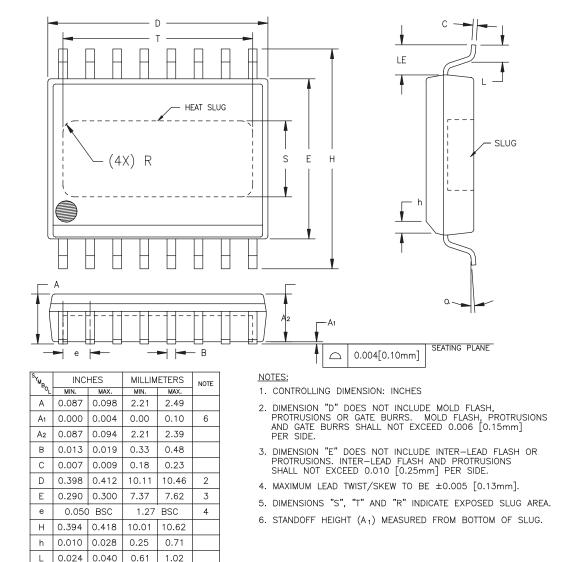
S7 Package Outline - 16 Pin Wide Body SOIC with Heat Slug
